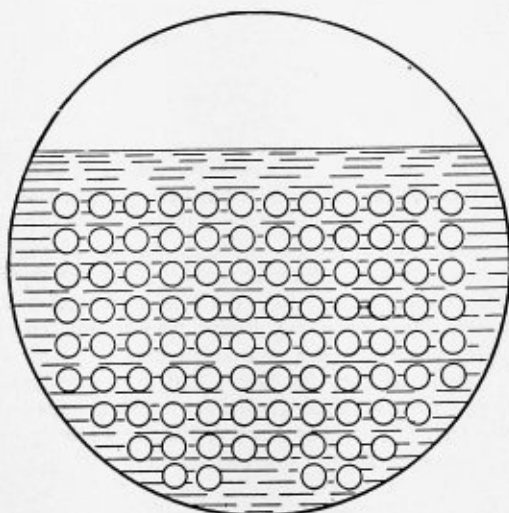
SECTION THROUGH TWO 100-HORSEPOWER BOILERS.
